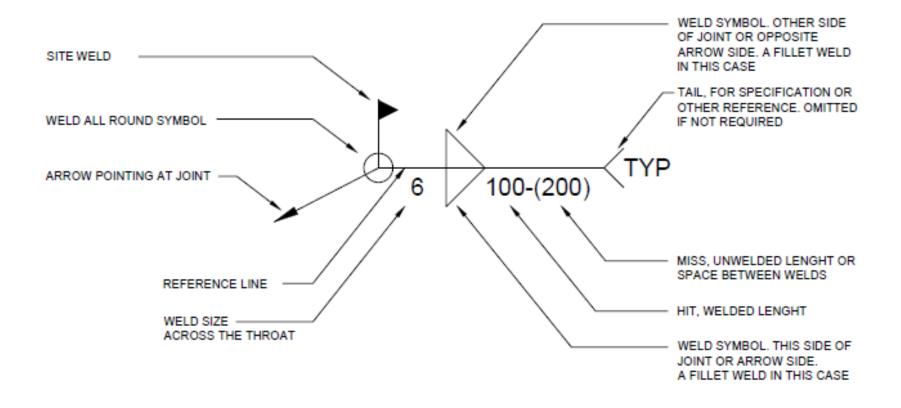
Interpretation of Welding Symbols
